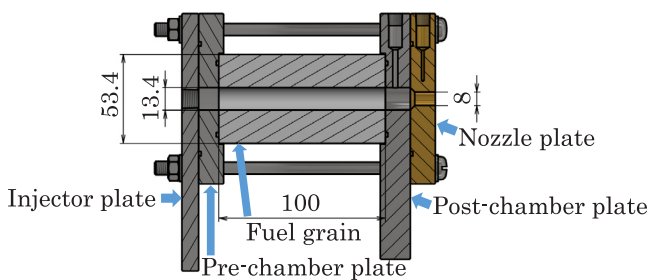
Cross-section of the cylindrical test motor (drawn in mm).
